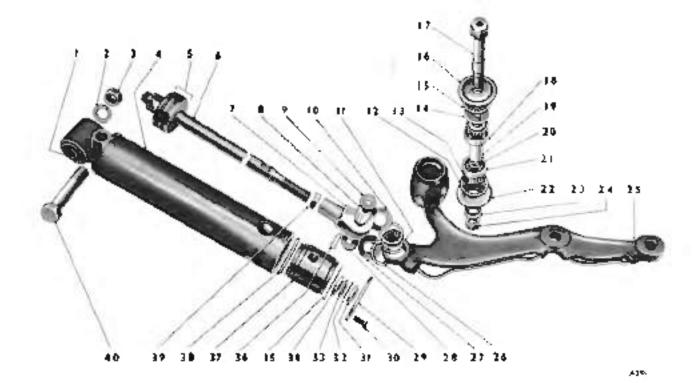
Centre steering lever details and power cylinder -- power assisted steering -- \$1 cars
